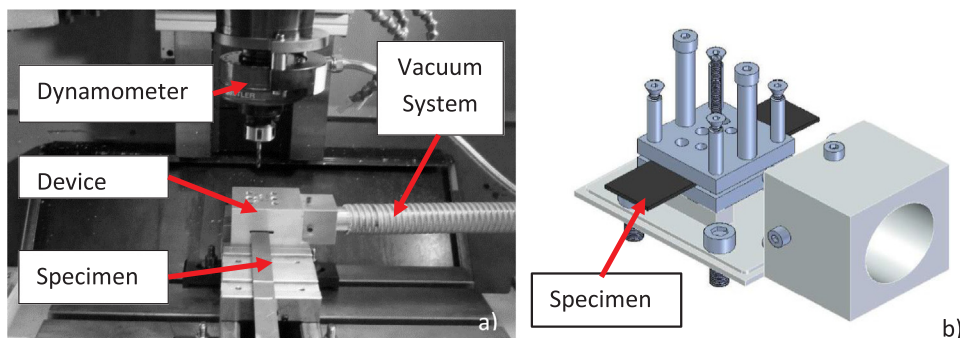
a) Machining center used for drilling tests, showing Dynamometer Kistler 9123C, vacuum system for chip collection and special device. b) special device detail.
